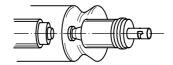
Leak-tight coupling for a 14 mm diameter rod
